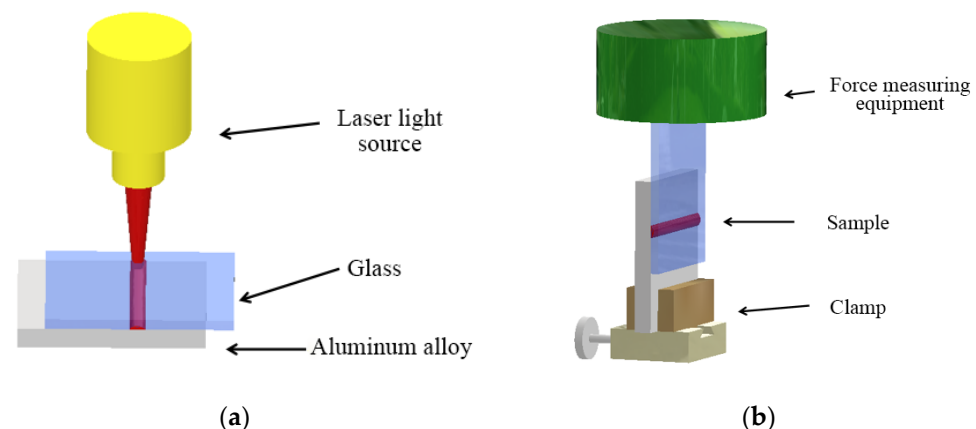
Schematic of welding and shear force test. (a) Welding diagram. (b) Shear test diagram.
